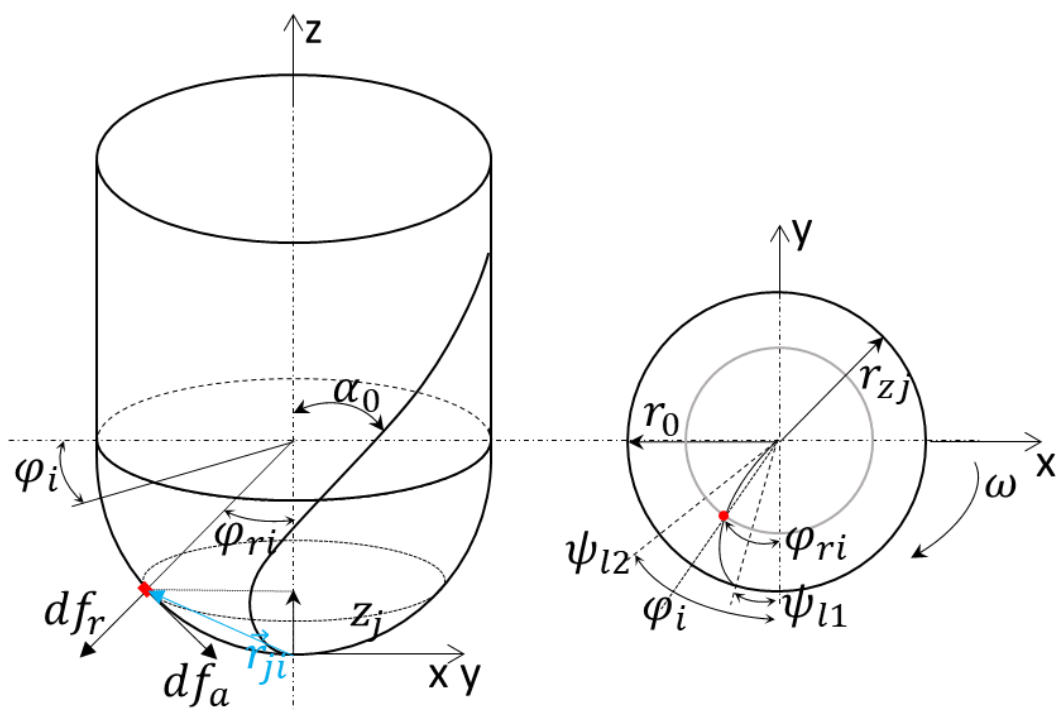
Geometry and tool coordinates for a ball end mill cutter
